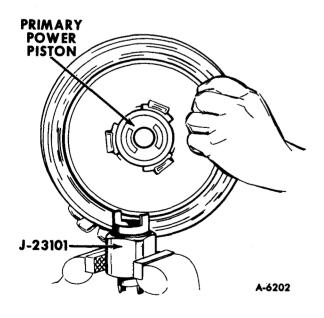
Positioning Primary Power Piston in Tool J-23101 (Small Dia. End Up)
